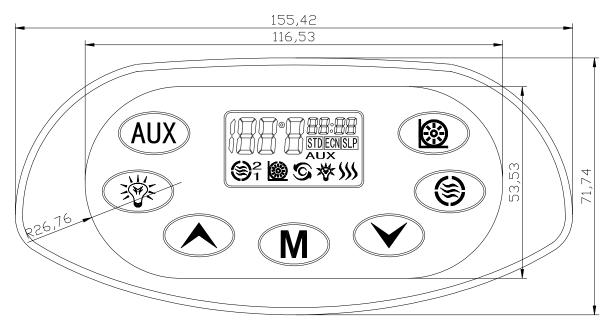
A8=OFF 7 keys single color back lighting control panel- Installation sketch(156*72mm)
